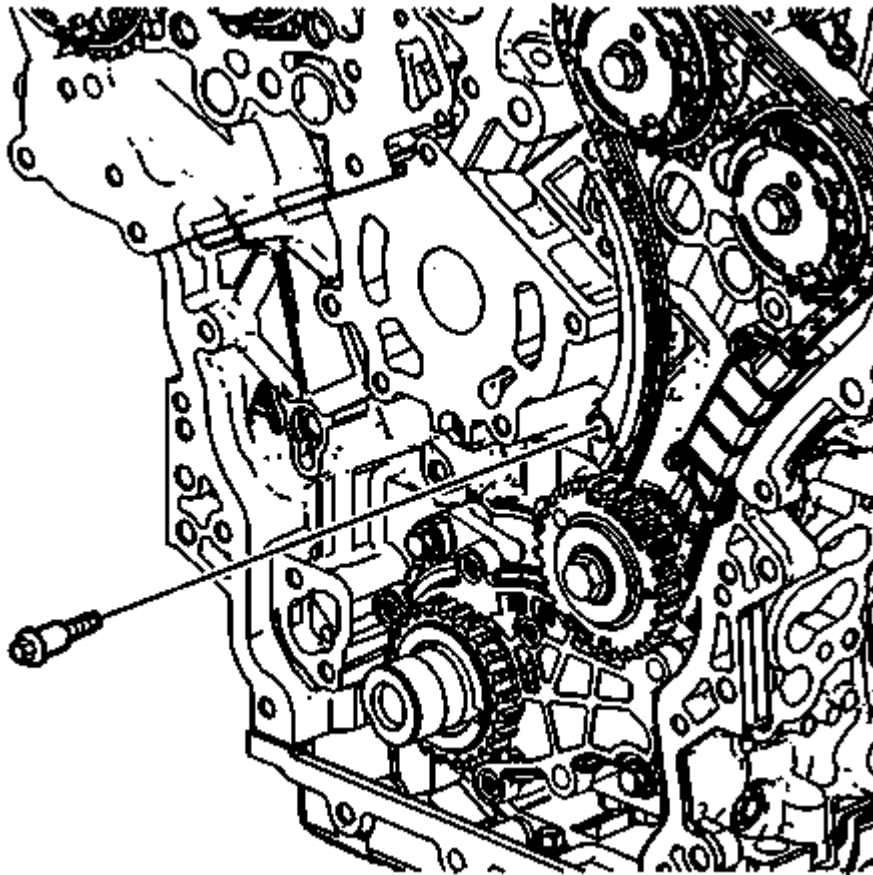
Identifying Secondary Camshaft Drive Chain Shoe Bolt
